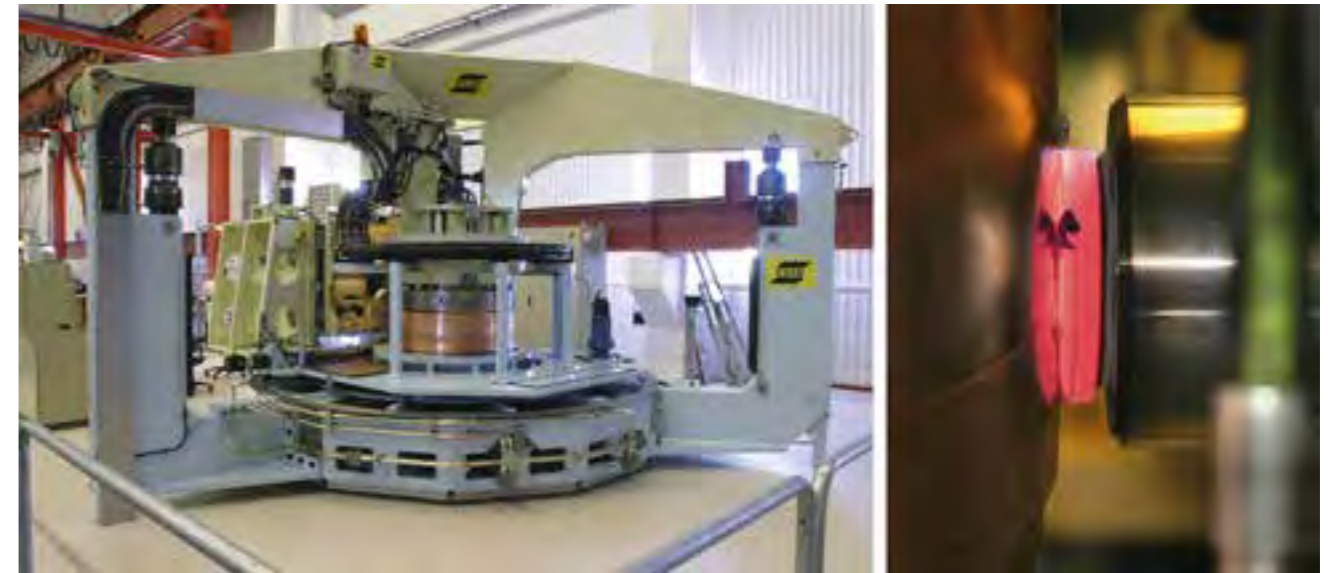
Friction stir welding of copper lids. The image to the left shows Canister Laboratory equipment for development, and the image to the right shows the rotating tool that is pressed into the joint between the parts that are to be combined.
